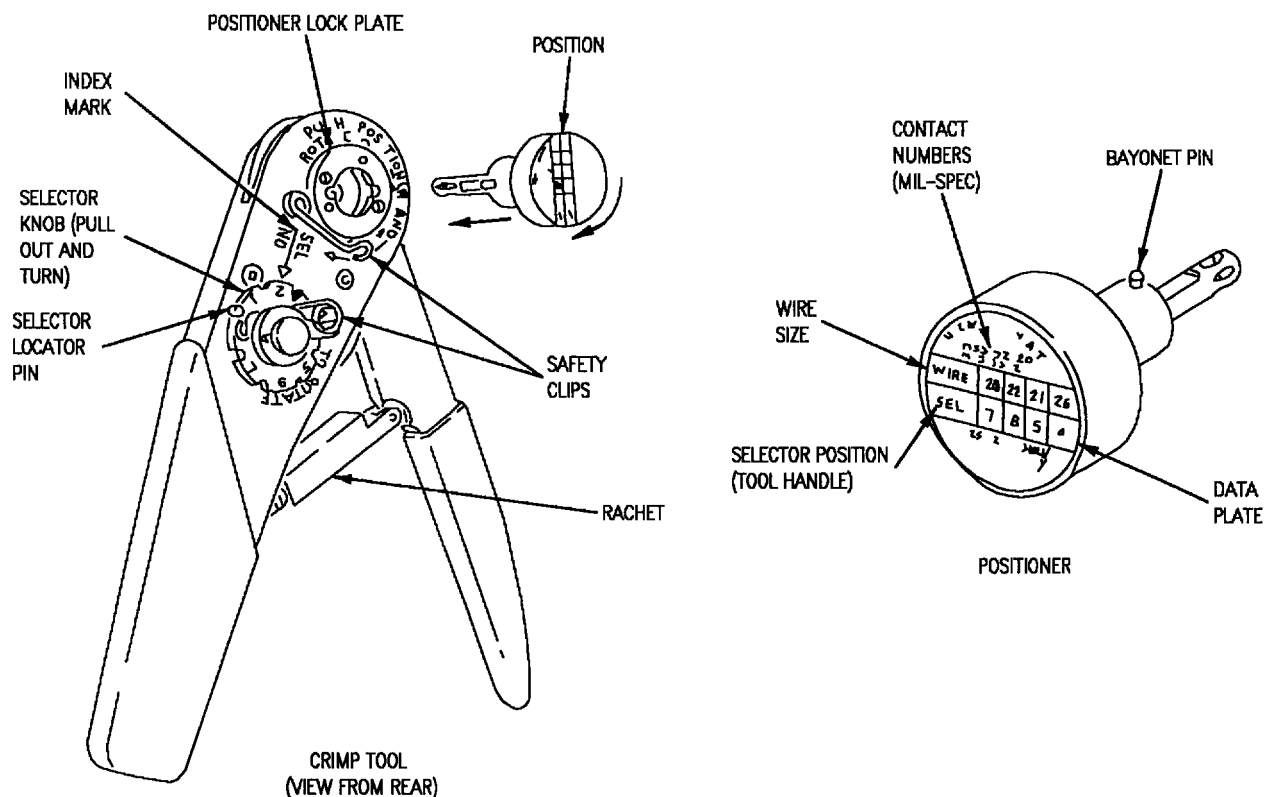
M22520/2-01 Crimp Tool Handle and Positioner
